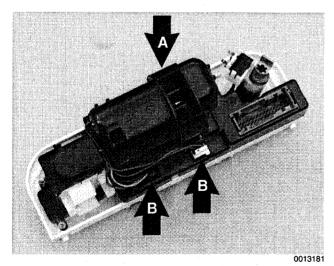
Sensor fan (A) and harness (B) in back of A/C control head (rotary-knob control head shown).
